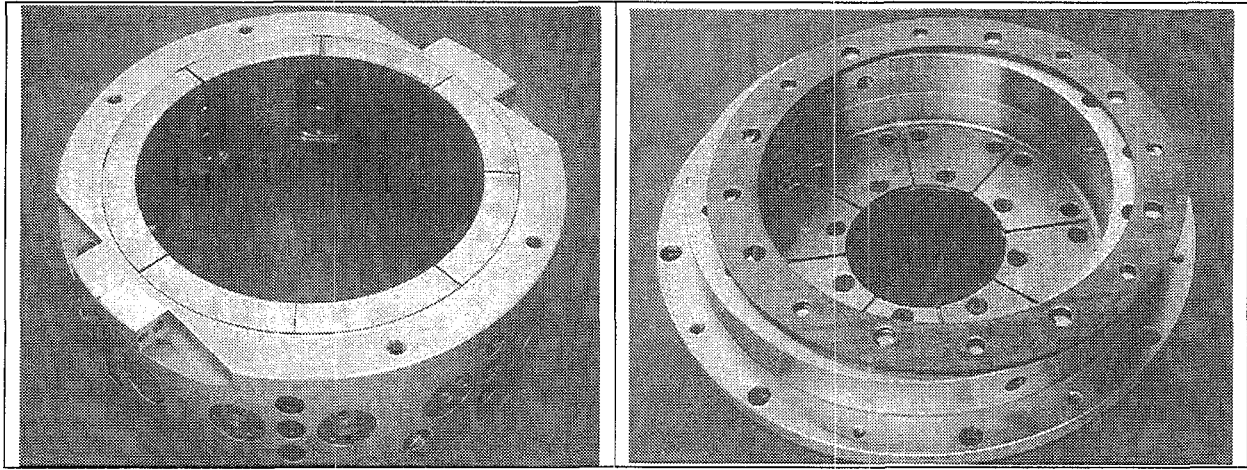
NAM Radial Auxiliary Bearing [5] Figure 2 NAM Axial Auxiliary Bearing [5].
